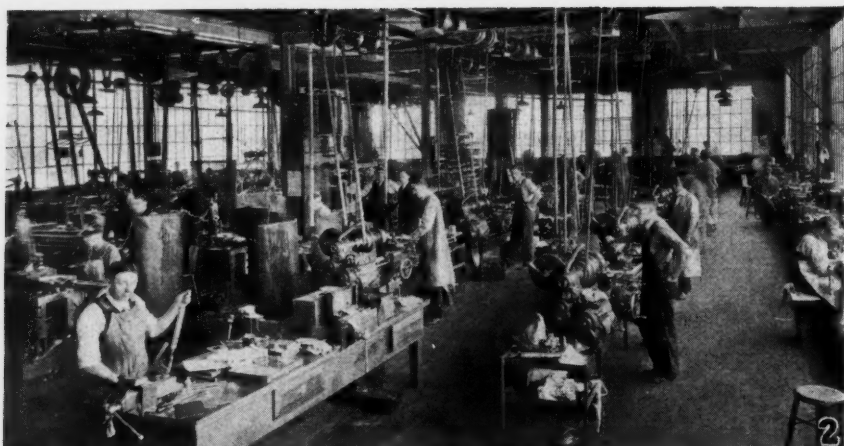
General view of machine shop. Fig. 3—700-ton hydraulic press for shaping sheet metal parts. Fig. 4—Removing stabilizer cover from press after forming.
